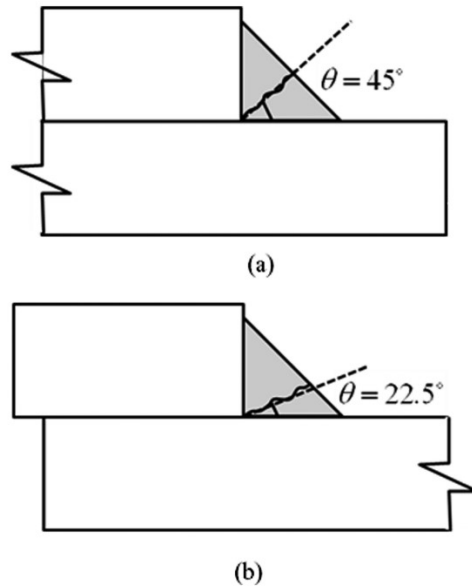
Typical failure angle: (a) failure angle of longitudinal shear weld; (b) failure angle of transverse shear weld
